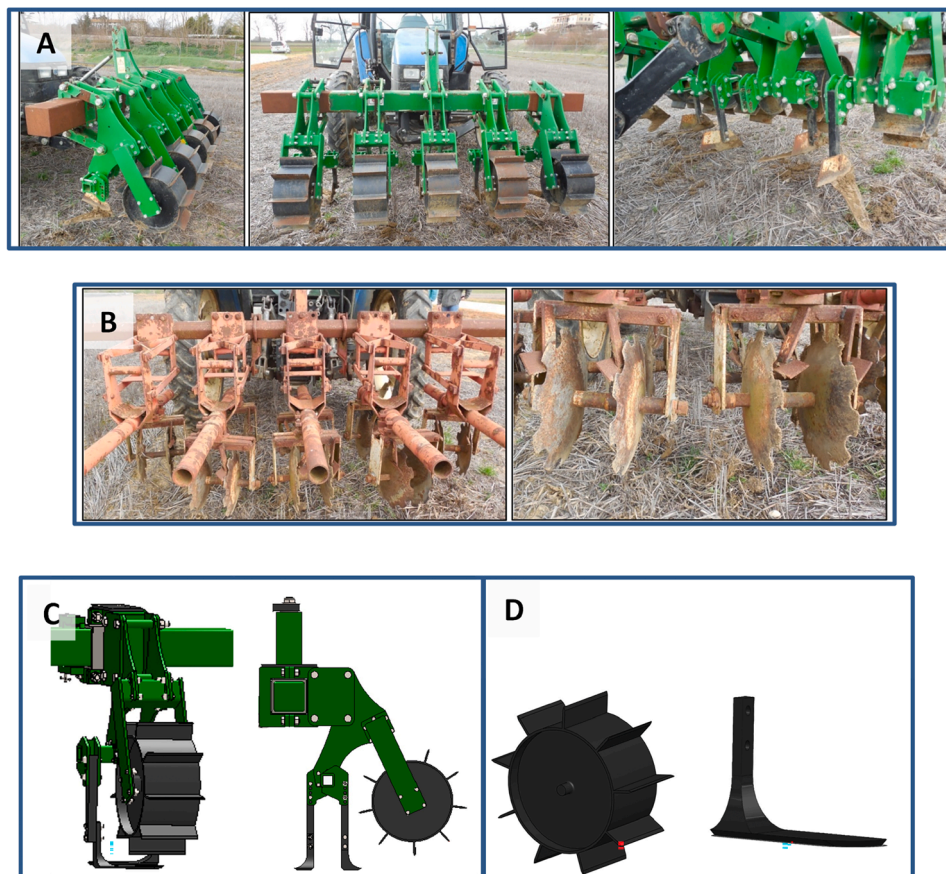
The machine for temporary intercrop management: (A) front roller details and static sweep tool and (B) rear disk machine. (C) Scheme of the working unit of the front mounted prototype, side view (on the right) and frontal view (on the left). (D) Working tools of the prototype, front roller (on the left) and static sweep tool (on the right).
